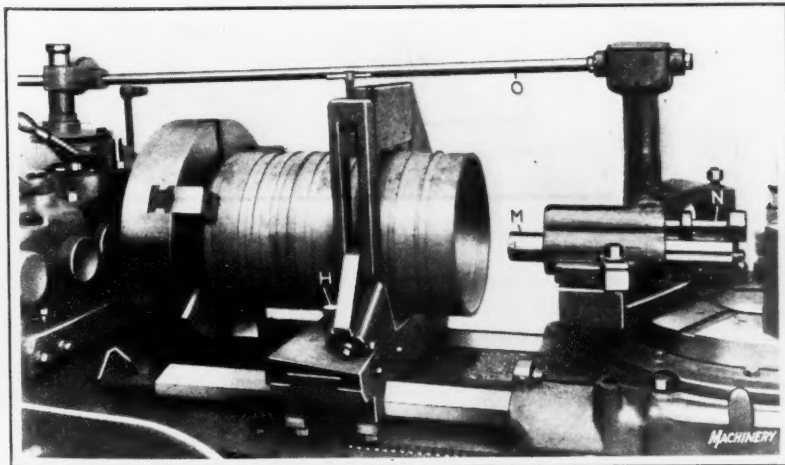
Cutting an 11-inch Diameter Thread by Means of an Automatic Attachment
